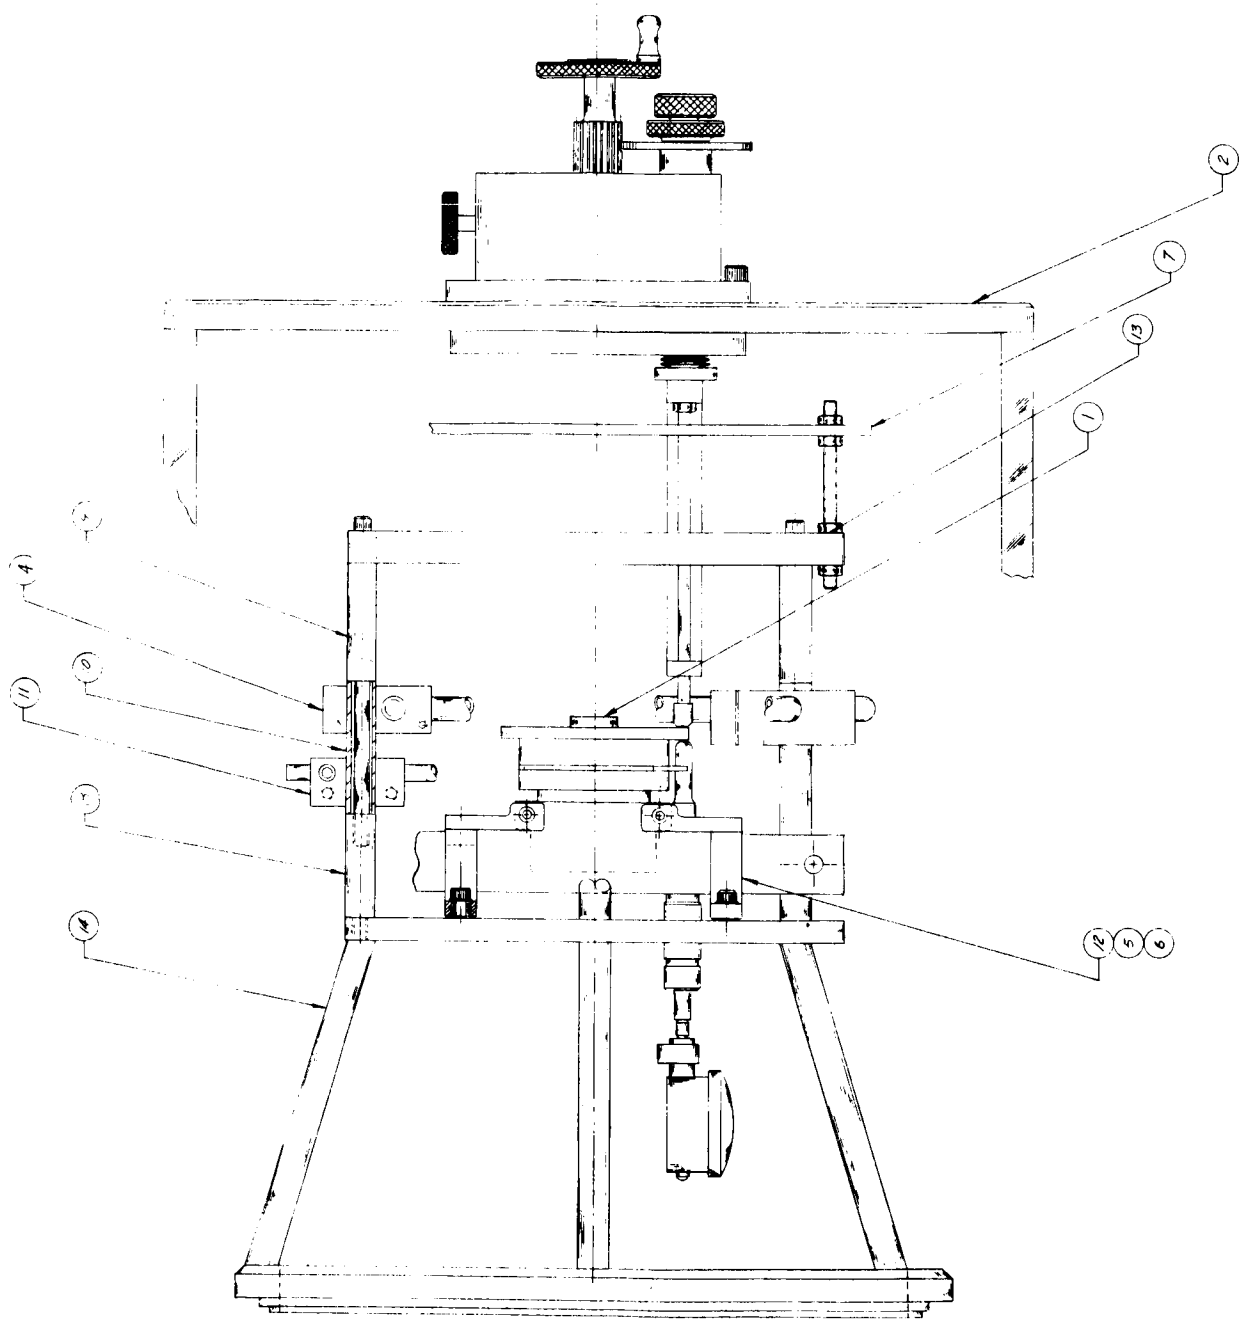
VARIABLE PARAMETER TEST VEHICLE MOUNTING FIXTURE
